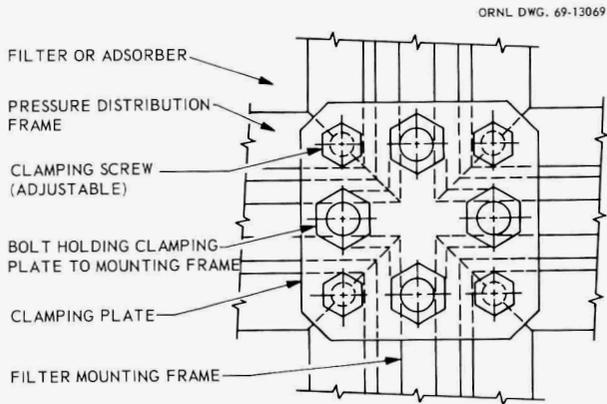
Clamping plate assembly, Brookhaven bypass filter pit. Clamping pressure on individual filters is adjustable, but entire assembly must be removed to replace a filter.
